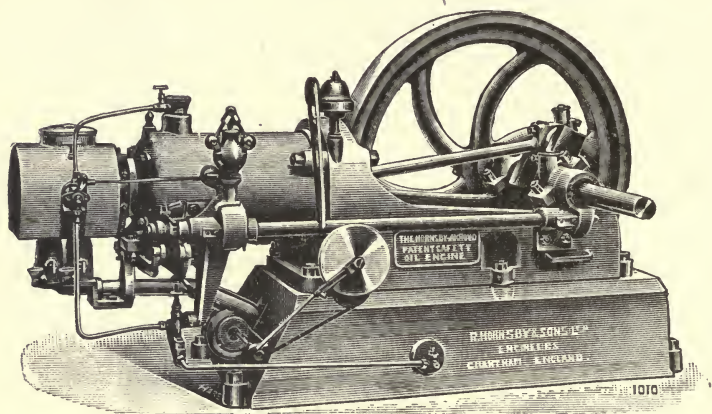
Hornsby-Ackroyd Oil Engine.
